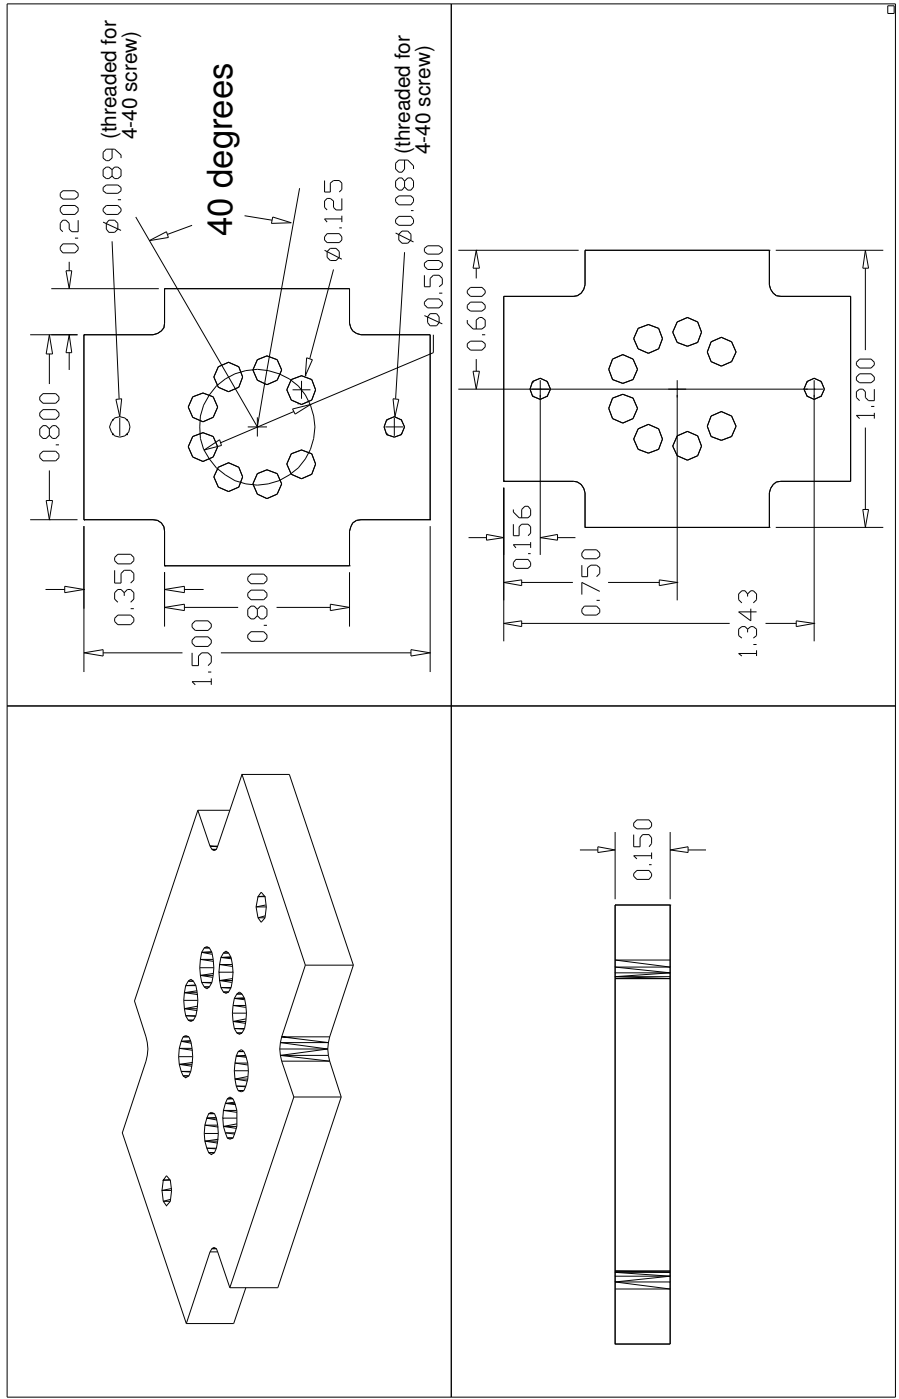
Dimensioned adapter for TO3 laser package. Dimensions are in inches.
